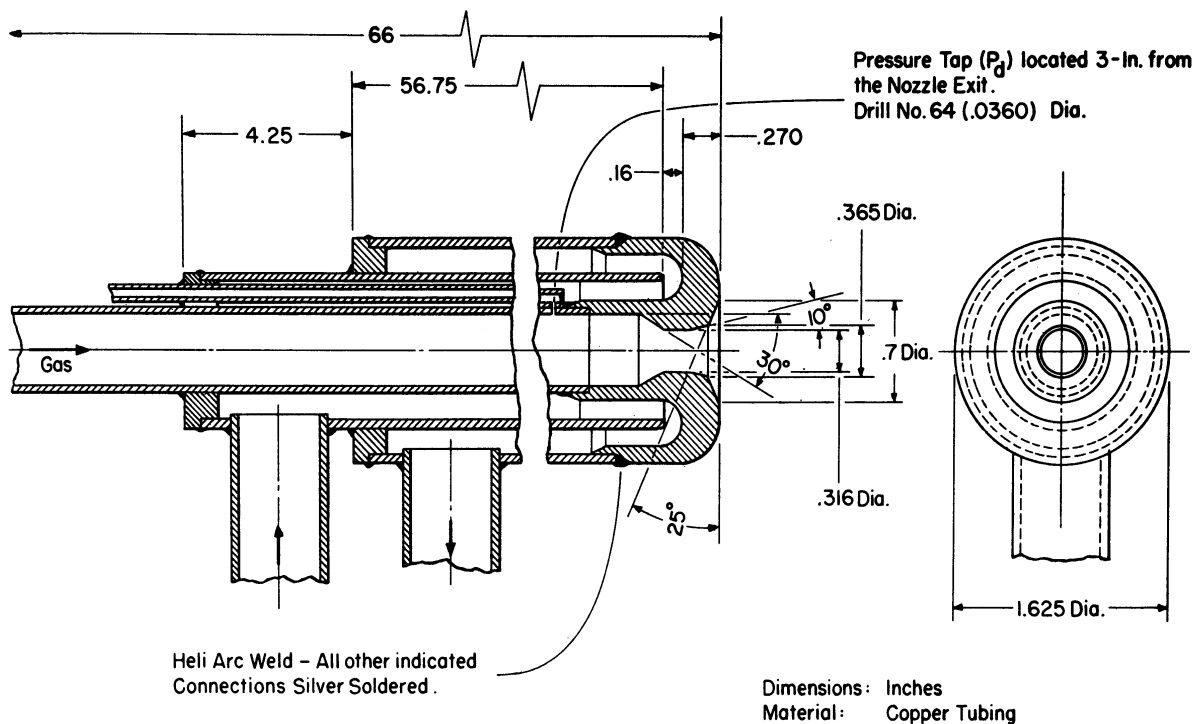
Detail Drawing of the Lance with the 0.316 inch Diameter Nozzle.
